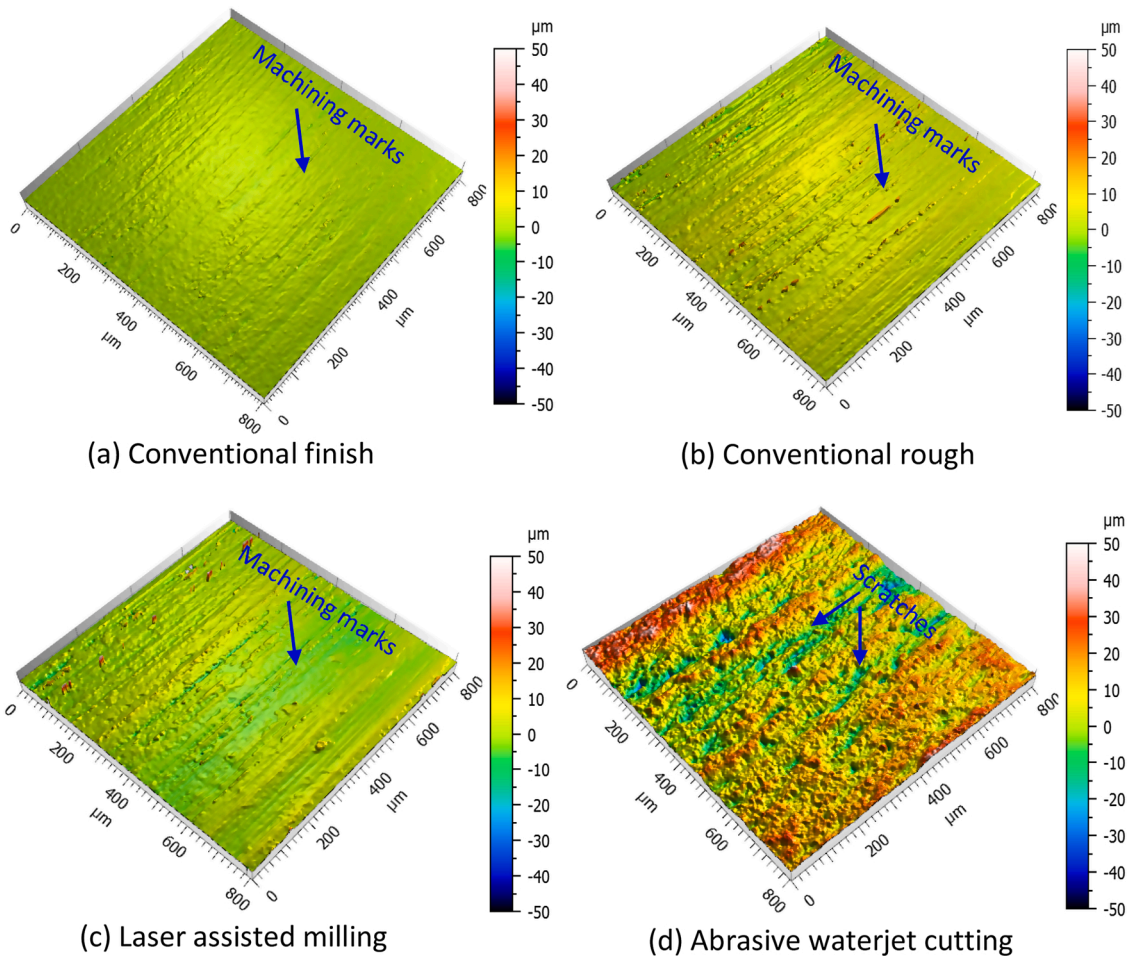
Surface topography of workpiece machined by different processes: (a) Conventional finishing milling, (b) Conventional rough milling, (c) Laser assisted milling and (d) Abrasive waterjet cutting.
